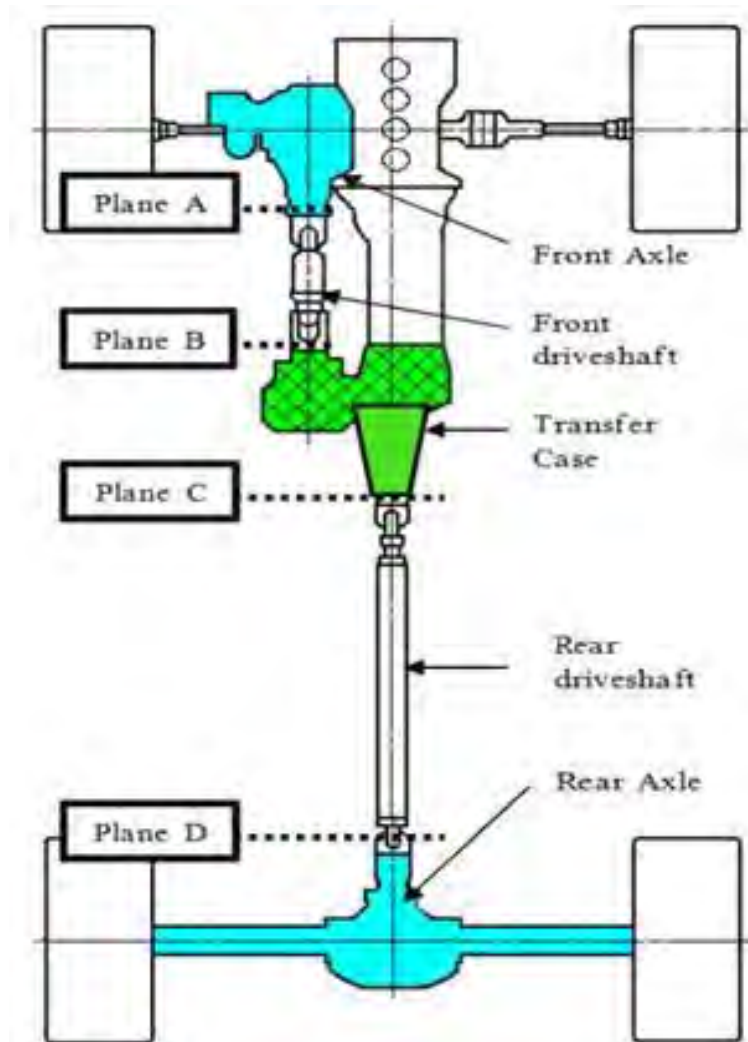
A typical light-duty four-wheel-drive pick-up truck driveline and the corresponding planes of imbalance[17]
